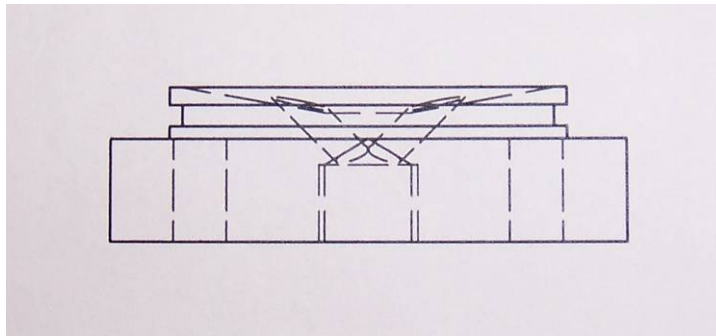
Side view drawing of manifold (courtesy of Mark Humphrey)
